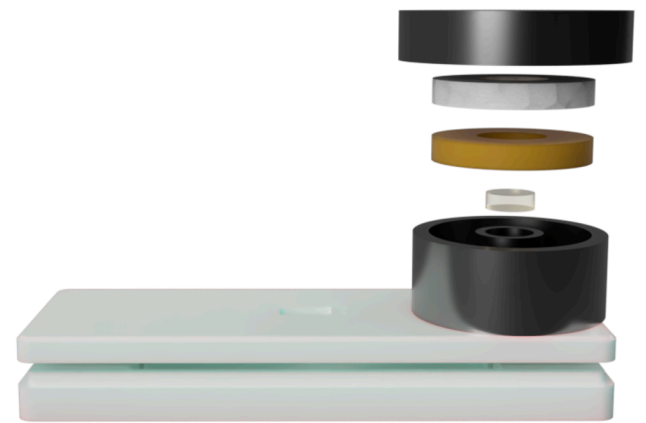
Exploded assembly. Heating chamber, PCM ring and sample well stack concentrically above the lateral flow housing.
